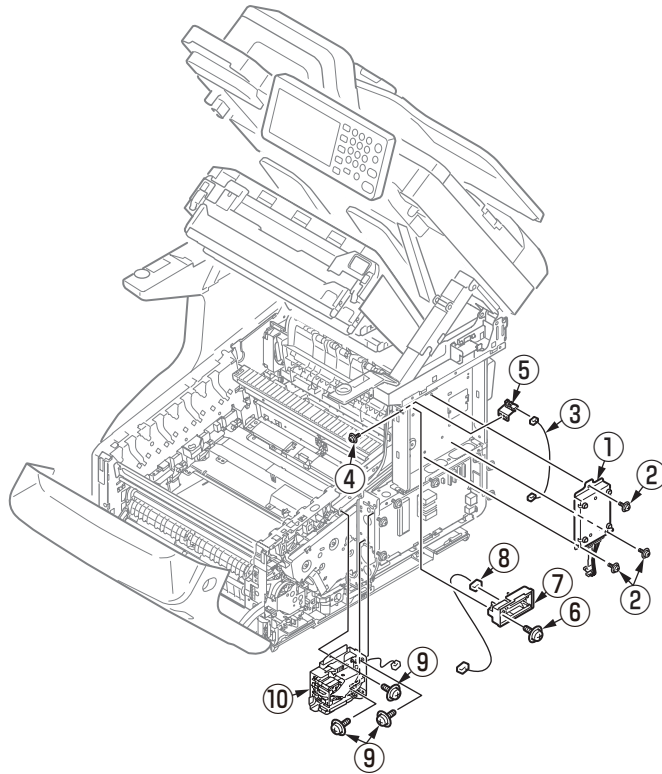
Main Board Assy., Outline Drawing
